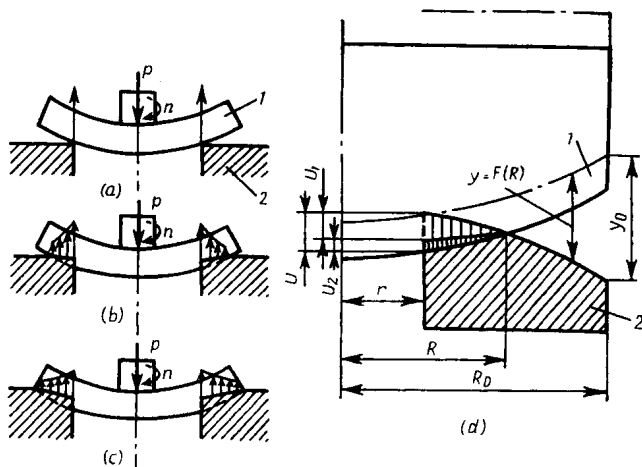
Diagram of running-in for inaccurately machined or deformed parts
